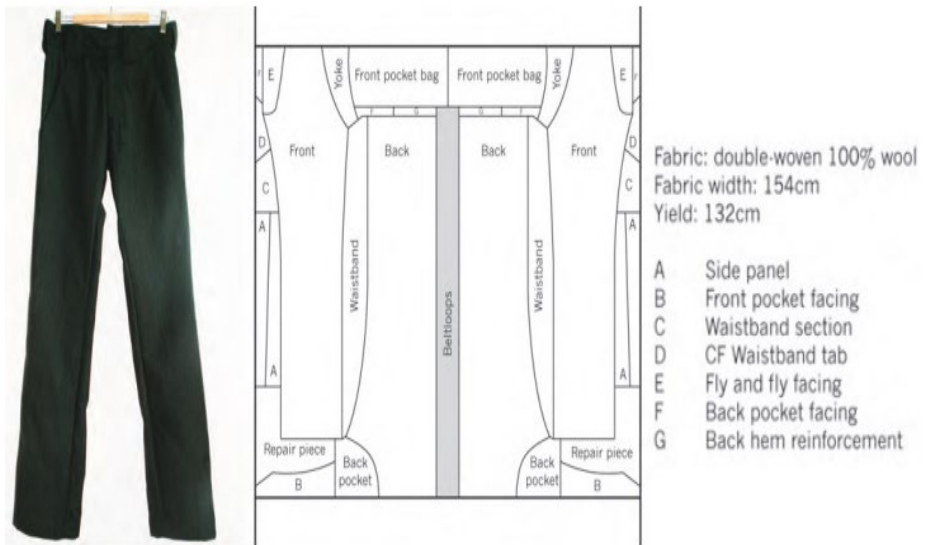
Zero Waste Garment Design And Pattern Layout Sample, Source: Rissanen (2013)
